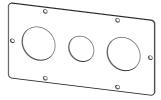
Blanking plate with holes for cable glands (FS4, FS5)
